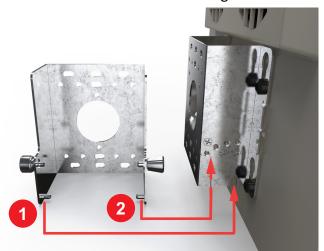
Attaching the Wall-Mount Bracket to the Ceiling-Mount Bracket
